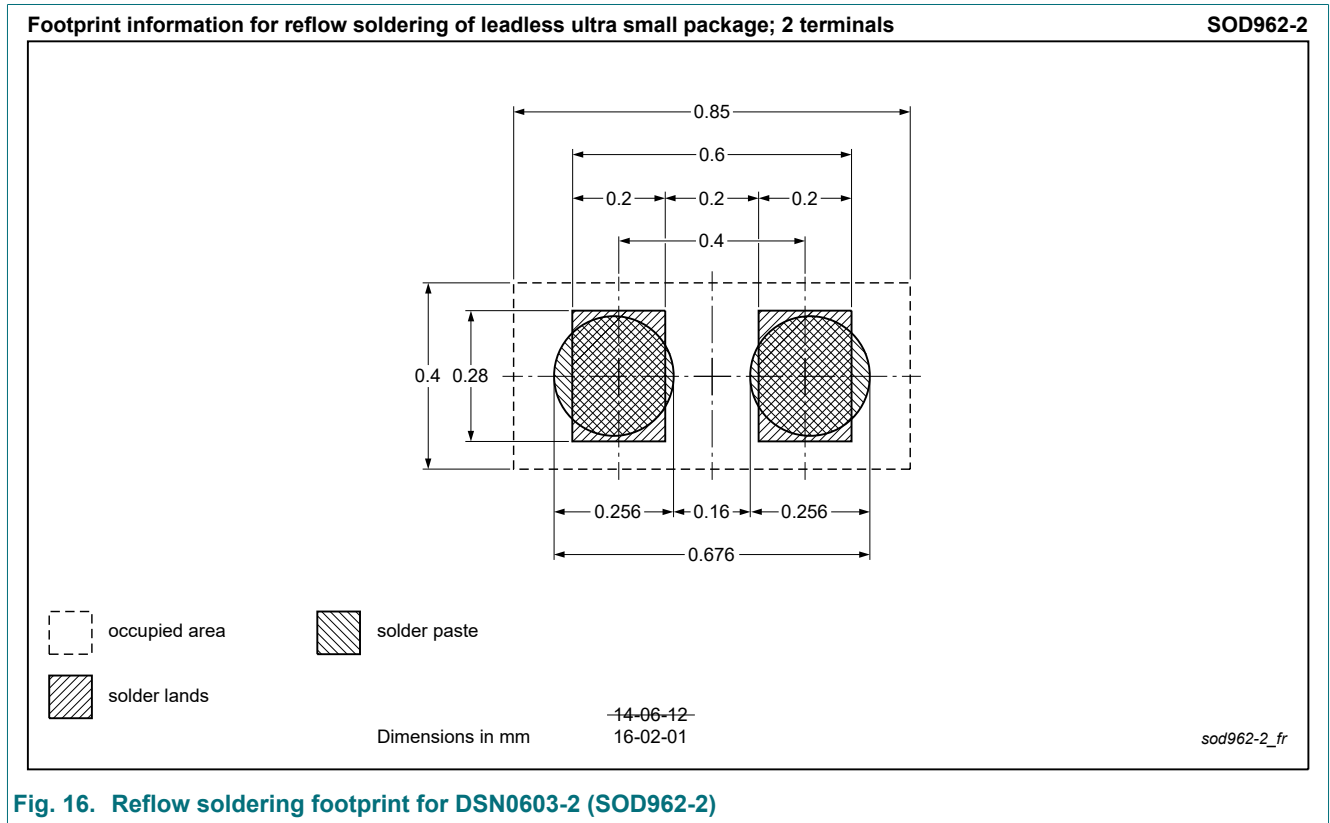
Reflow soldering footprint for DSN0603-2 (SOD962-2)
